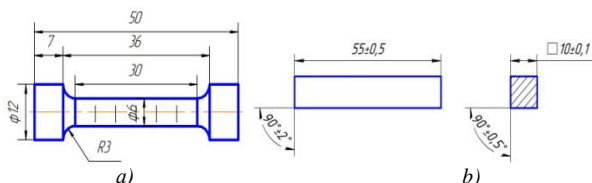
Dimensions of test samples for tensile test – a) and impact test – b)
